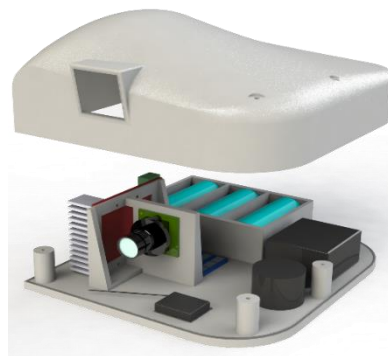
Integrated sensor array to be mounted on turbine blade. Ultimately, we anticipate that sensors will be built into blade design and manufacturing.
